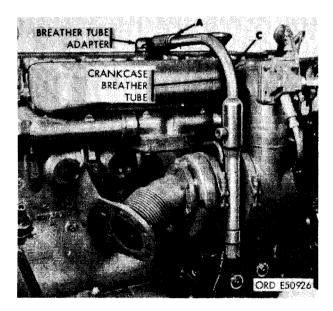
REMOVING OR INSTALLING CRANKCASE BREATHER TUBE (LATE MODEL ENGINES). 62. TURBOSUPERCHARGER
